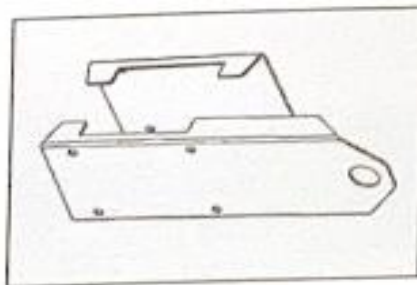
Install shaft support bracket on leg and install gate-opening shaft through it
